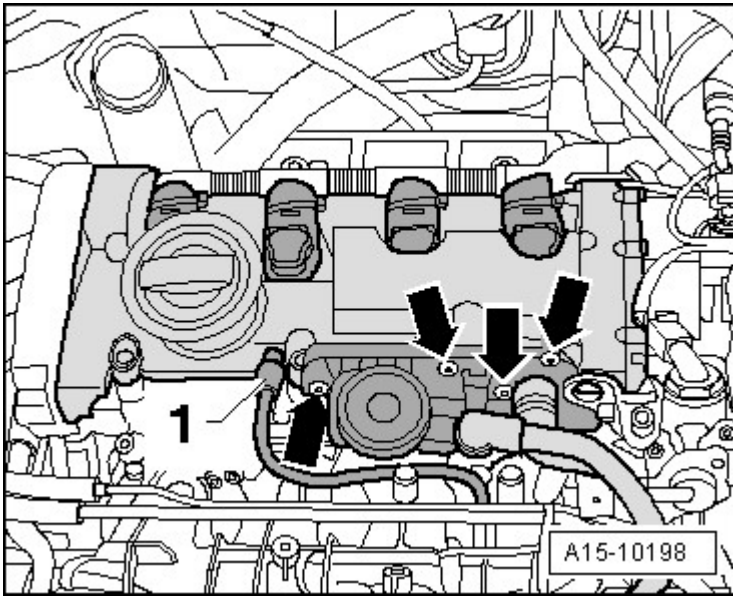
Identifying Valve Housing And Cylinder Head Cover
